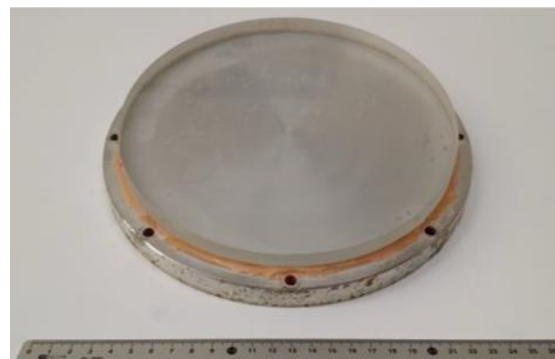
Photograph of off-axis asymmetric reflecting mirror finished by #8000 grinding wheel
